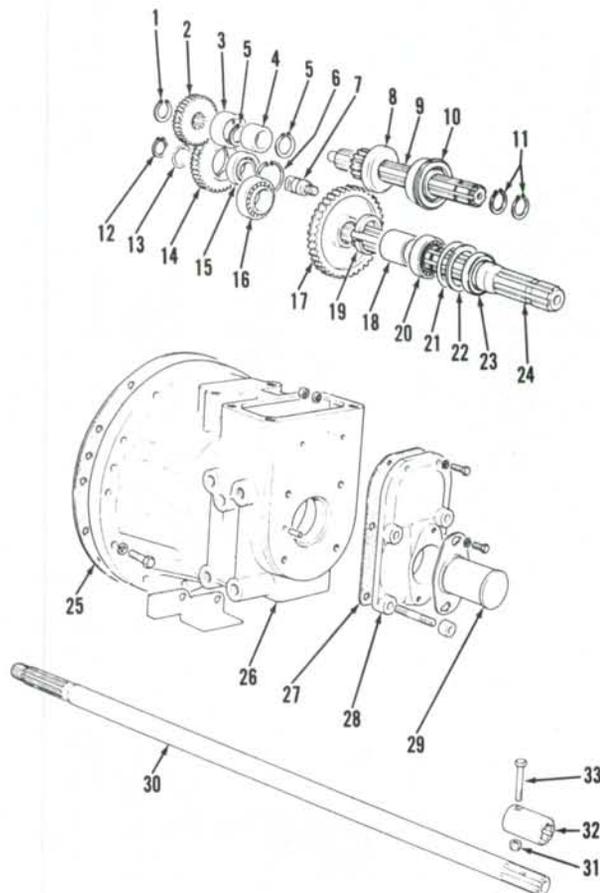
Exploded view of single speed (540 rpm) pto assembly used on some Models 1190, 1194, 1290 and 1294.
